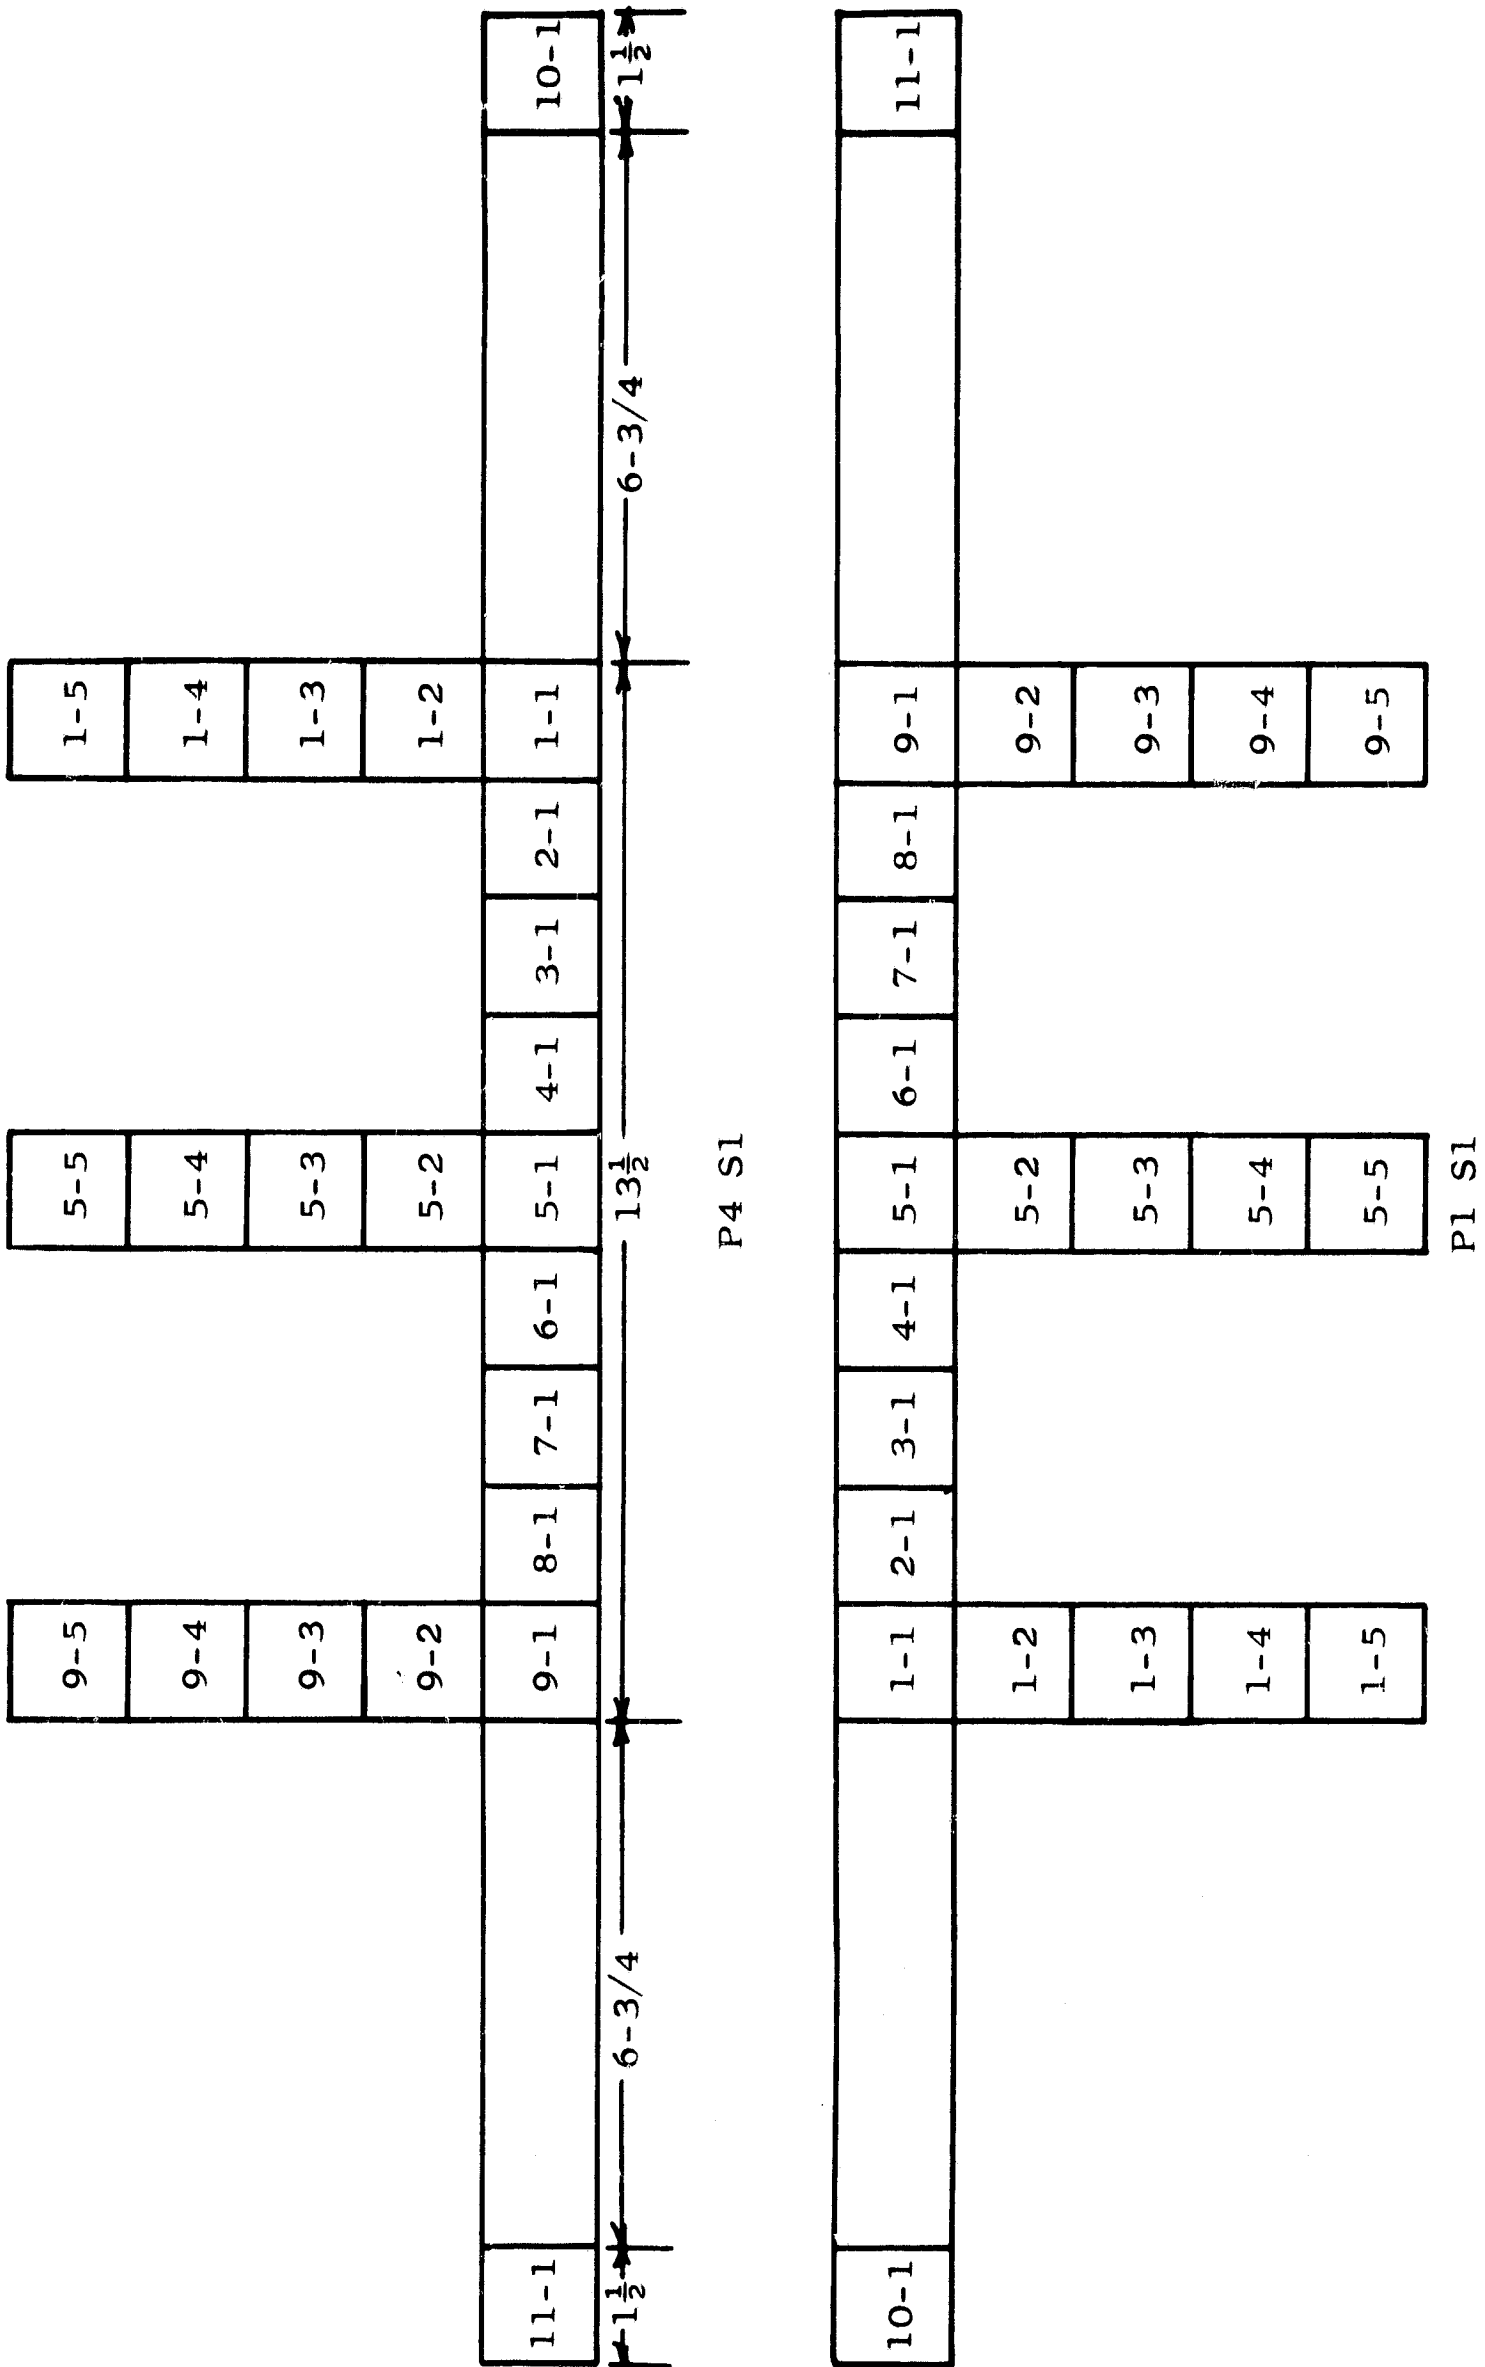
Locations for Surface Stress Measurements After Welding.
